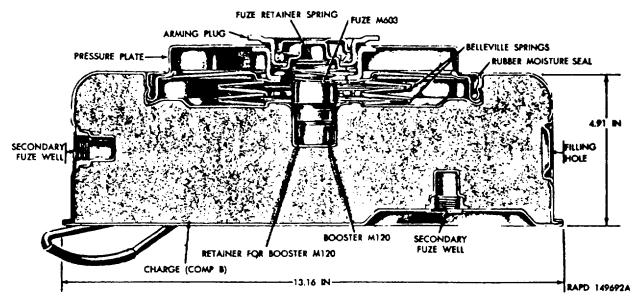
Heavy AT mine, with fuze installed – cross section.
